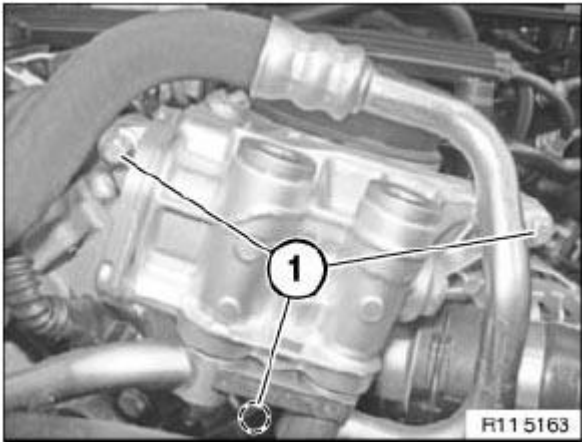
Identifying Oil-Coolant Heat Exchanger Bolt
